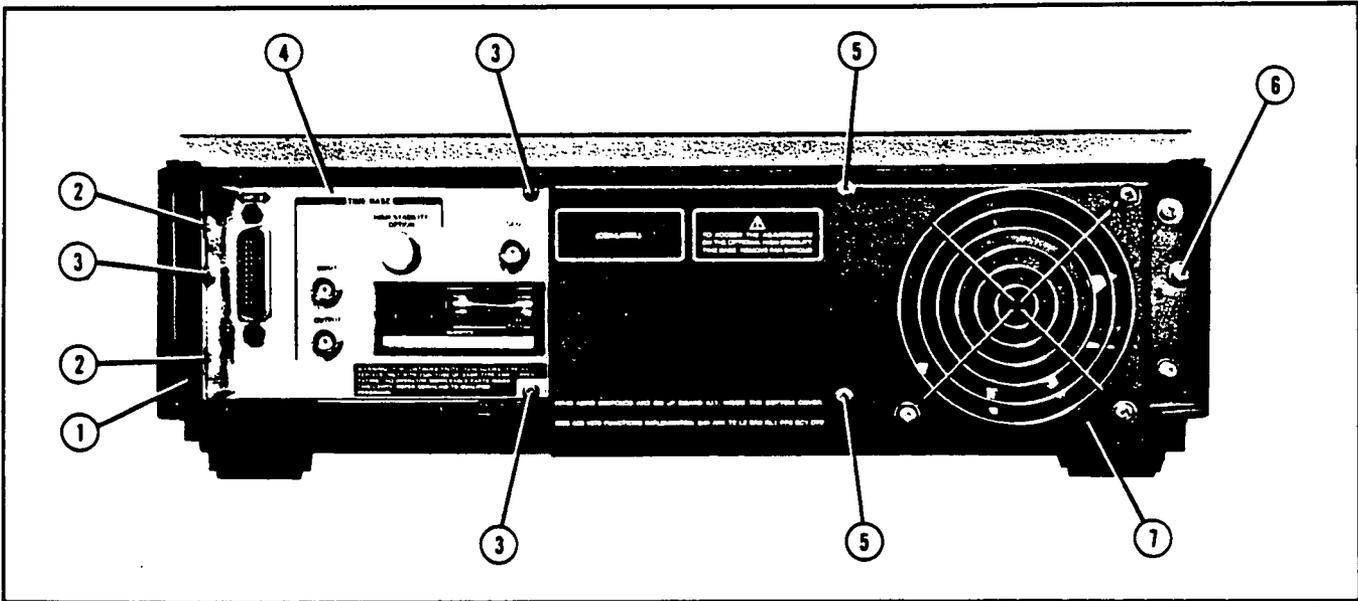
(2425A to 2509A). Rear-Panel and Fan Shroud Removal
